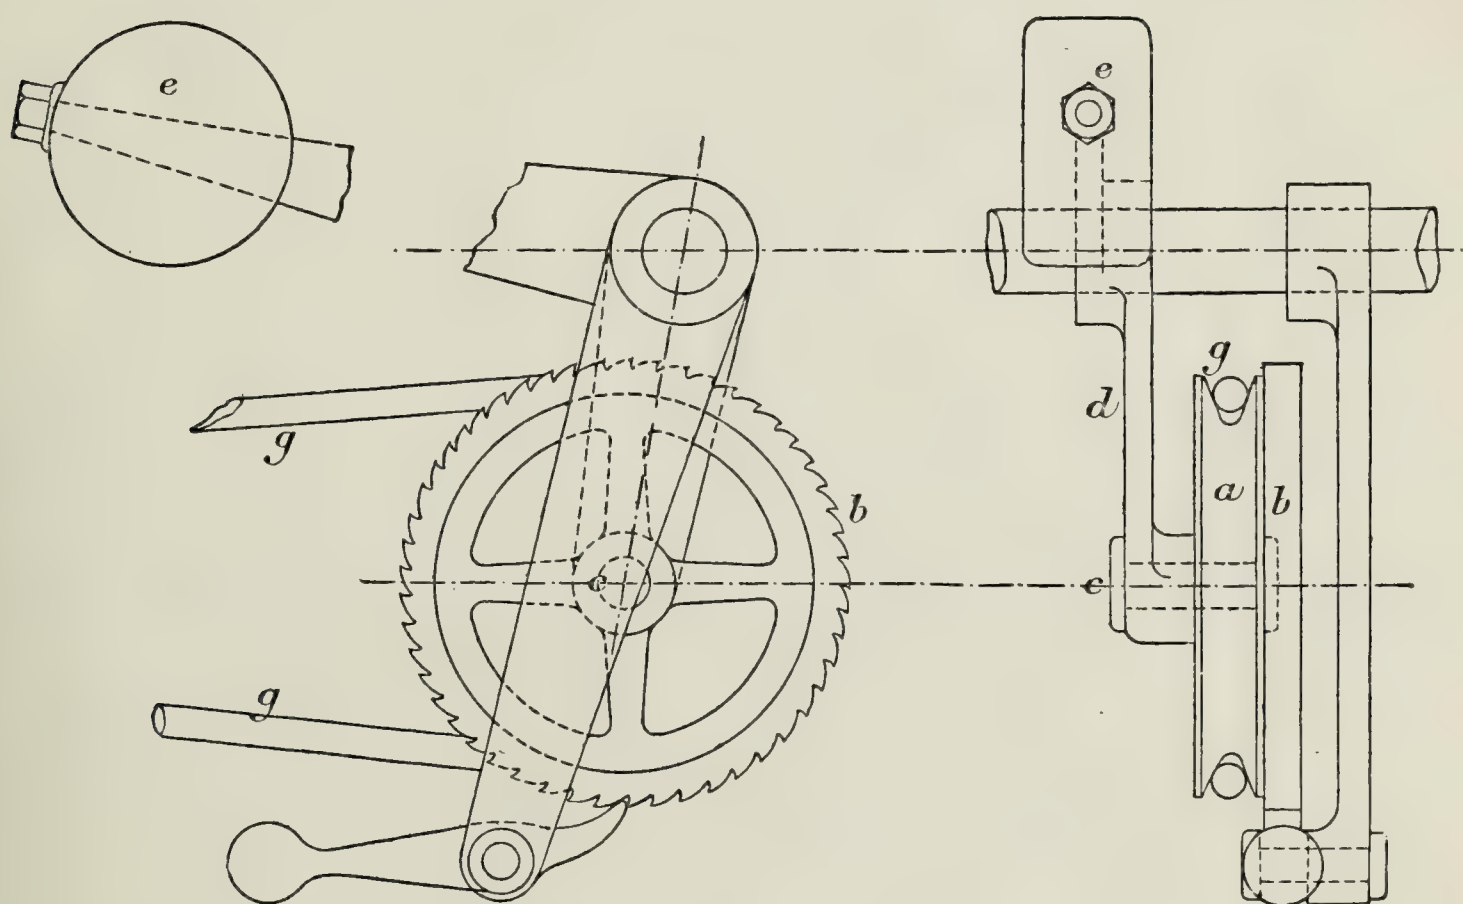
TURNING GEAR FOR MORISON STAMP.
